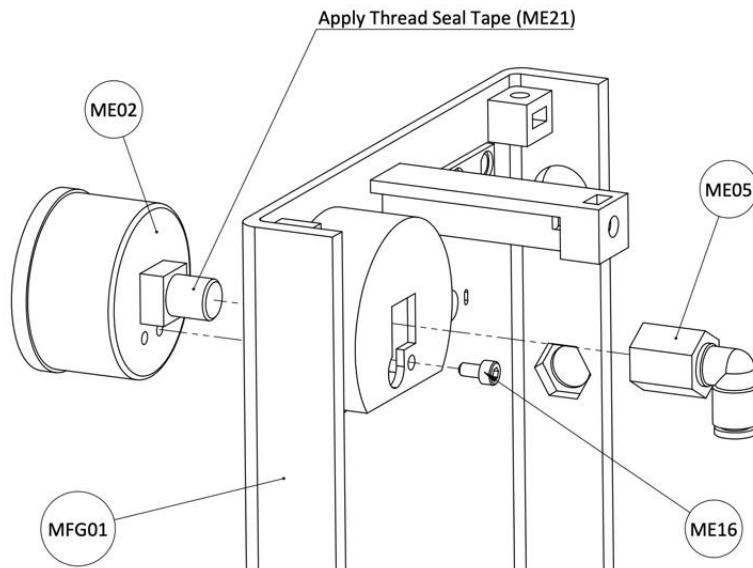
Instructions for installing the Pressure Gauge on the Front Housing.
